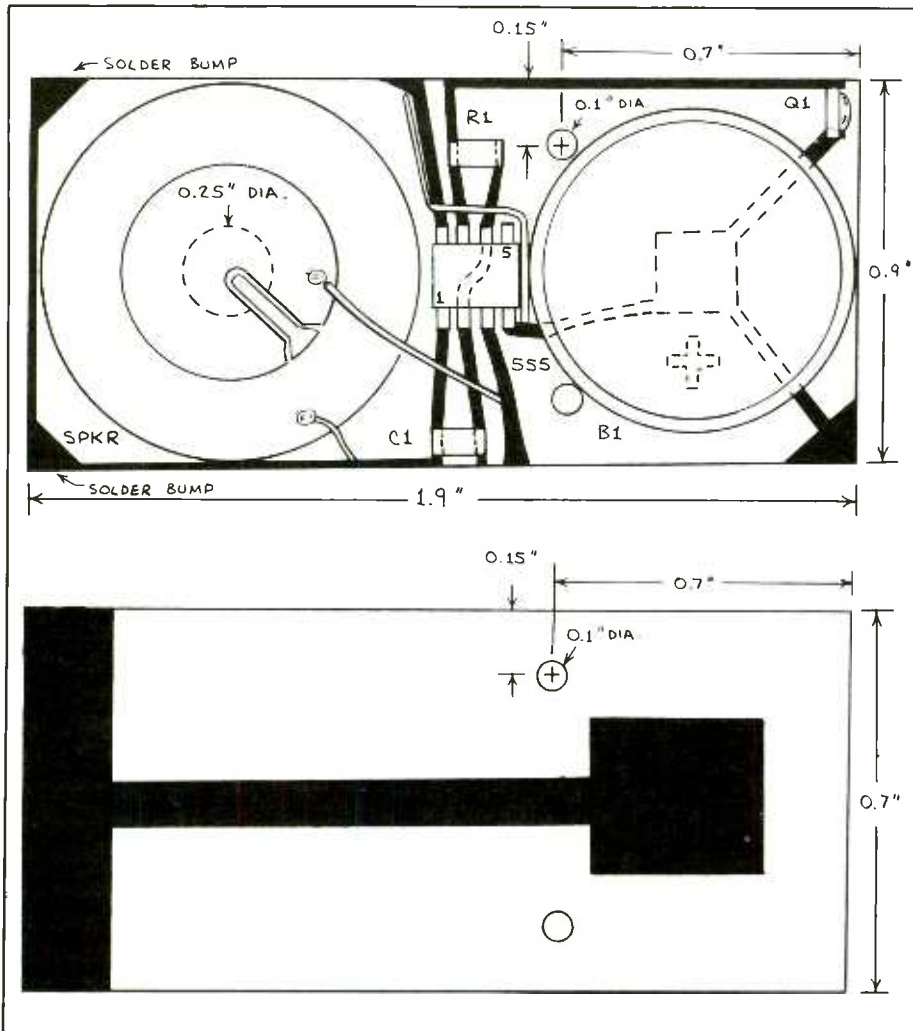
Assembly details for the light-probe circuit (upper) and a switch board for the light-probe circuit (lower).
